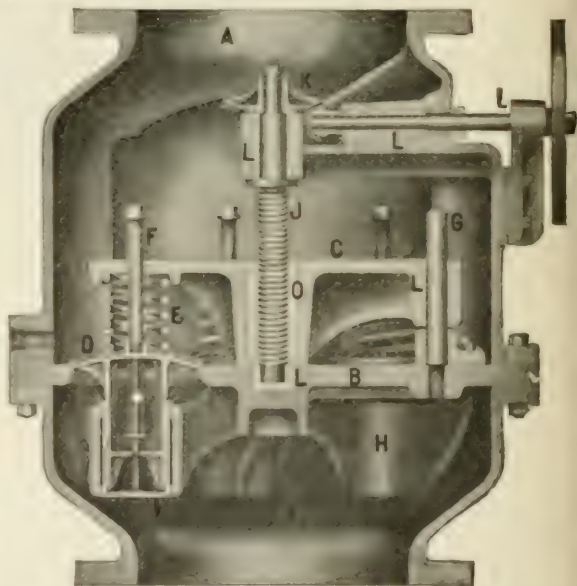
COCHRANE MULTI-PORT SAFETY EXHAUST OUTLET VALVE
